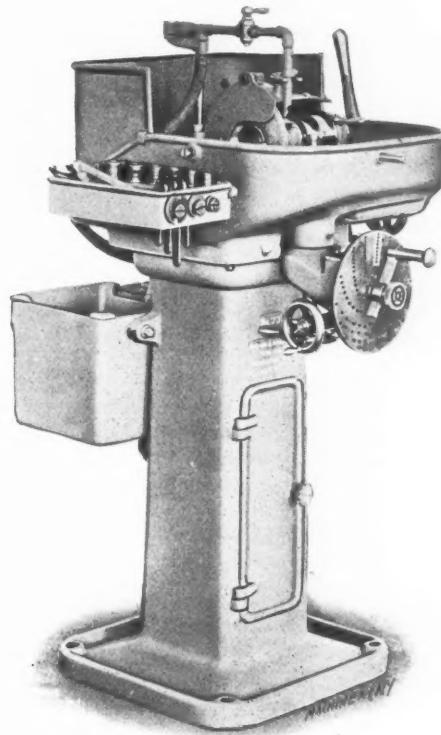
Brown & Sharpe Wet Grinder for Formed Gear-cutters.
